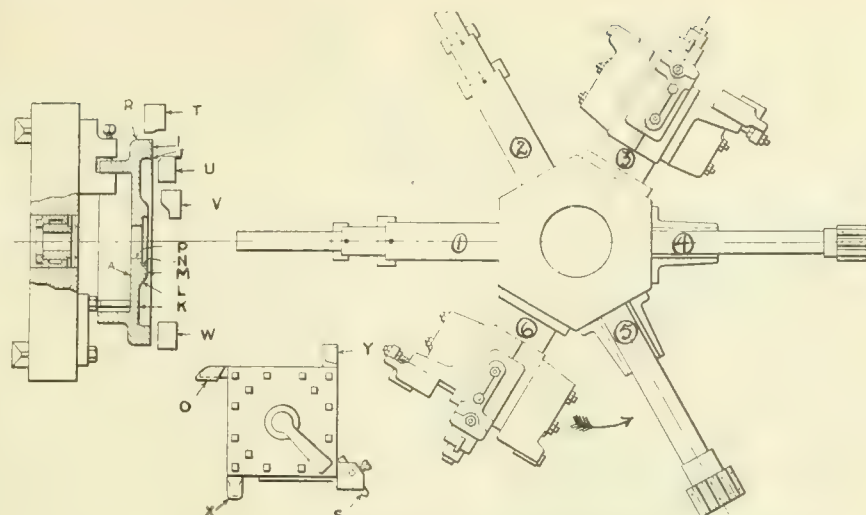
LAYOUT OF TOOLS FOR SECOND OPERATION ON THE FLYWHEEL SHOWN AT FIG. 6.
